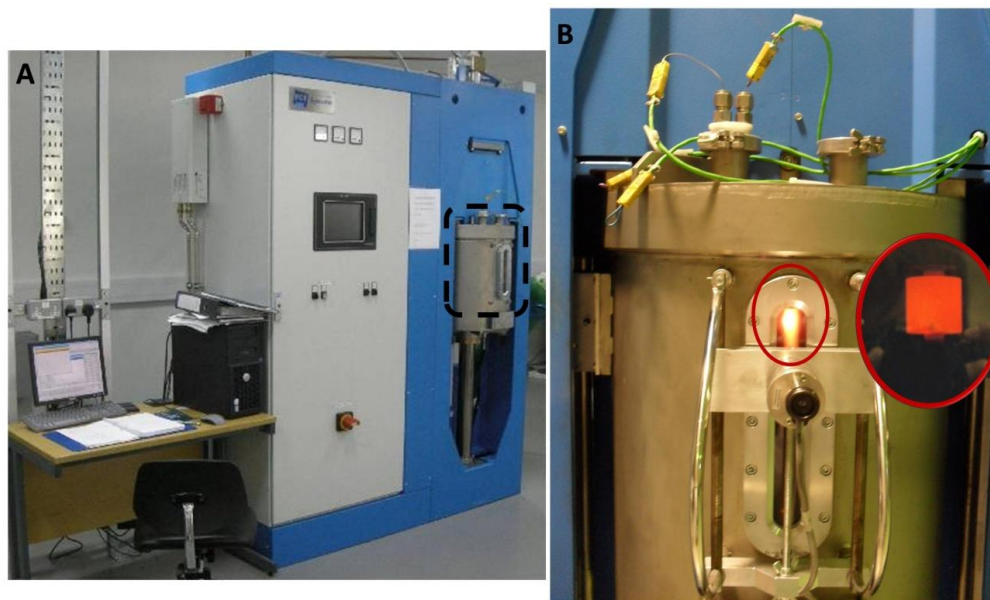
SPS furnace (A) and close-up of vacuum chamber with red-hot graphite mold (B)
